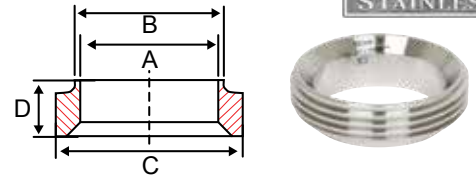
A4 - Long Thread Bevel Seat Ferrule
